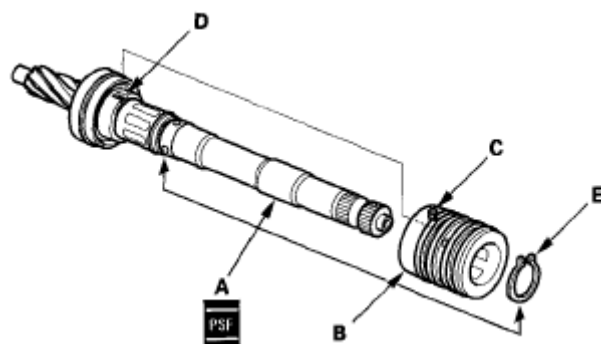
Identifying Area Applying Power Steering Fluid To Surface Of Pinion Shaft
